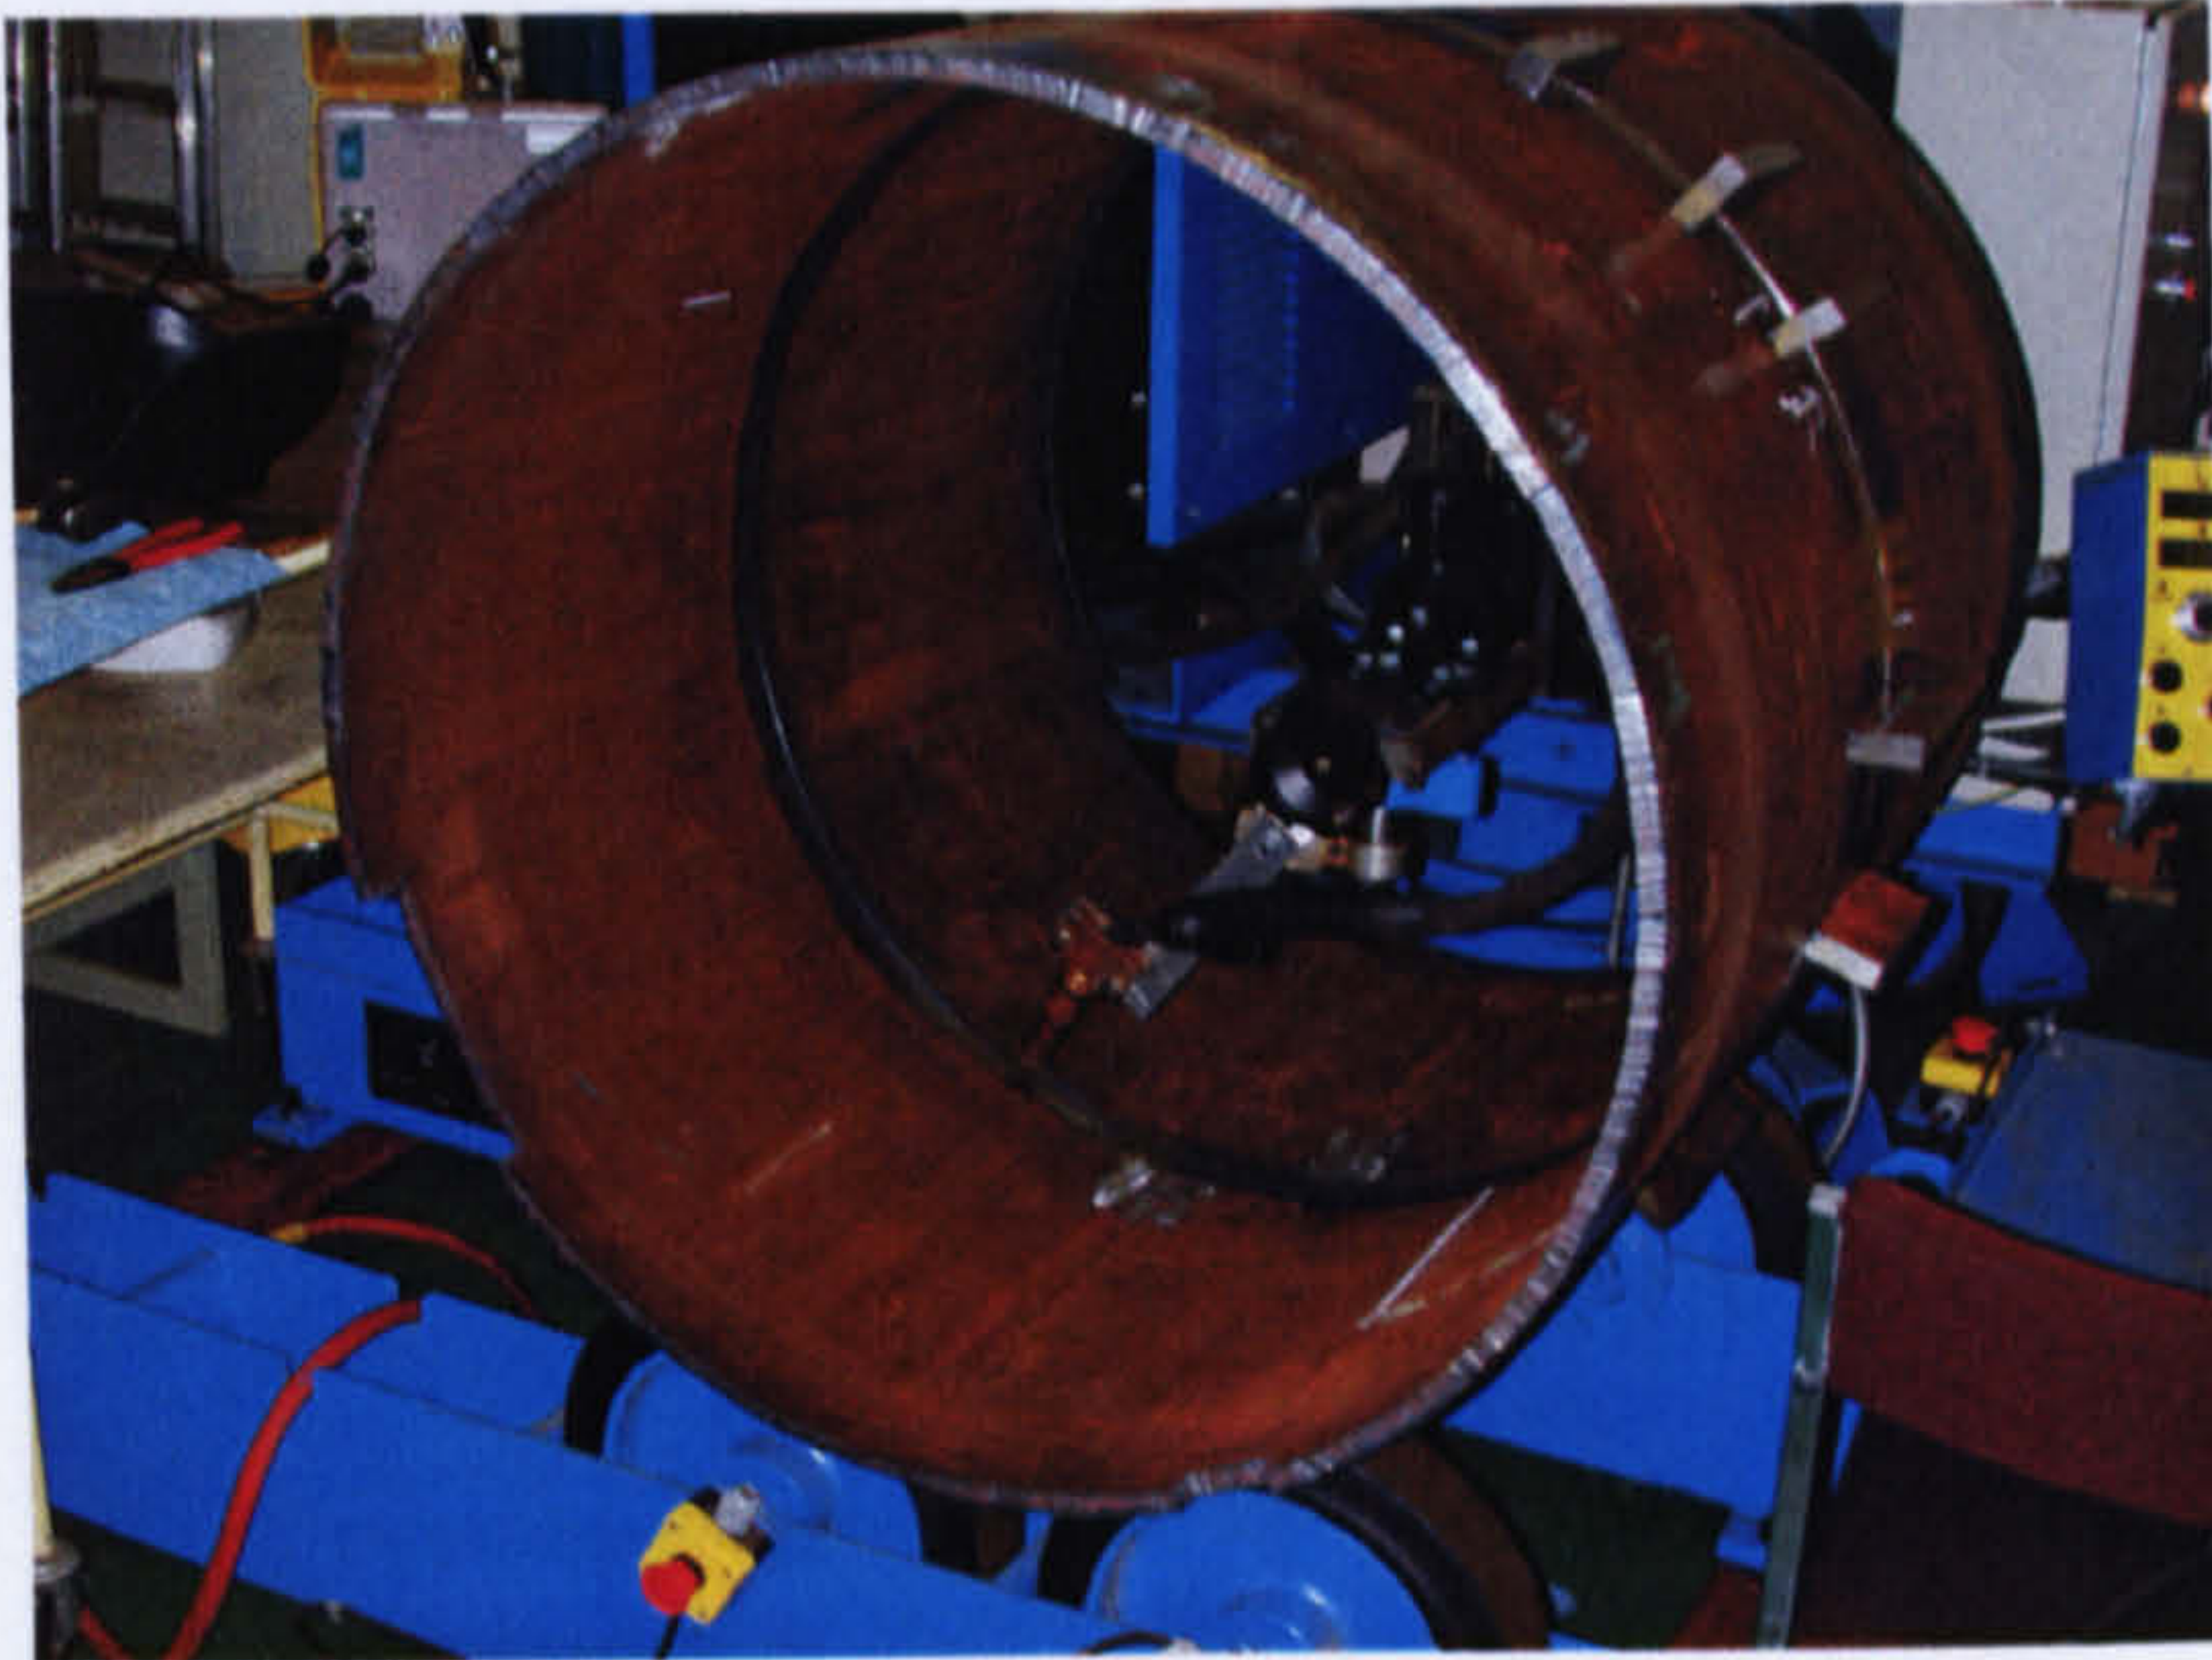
SAW column and boom setup for internal root welding
